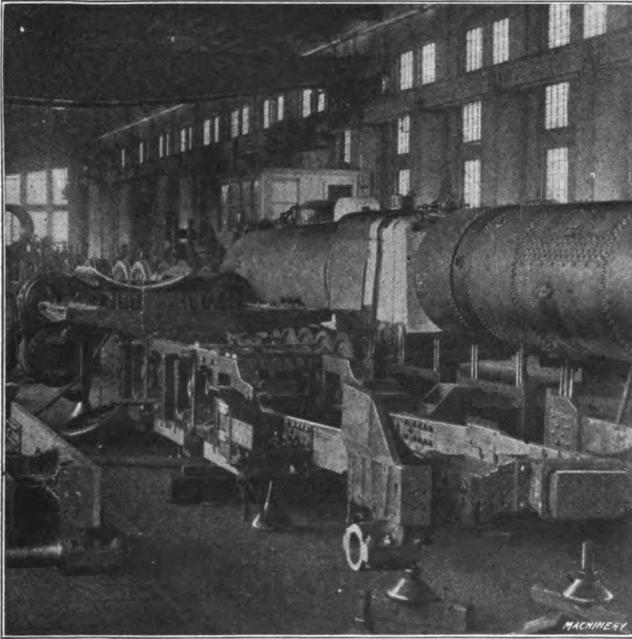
Frame after Cylinders, Braces and other Parts have been assembled
